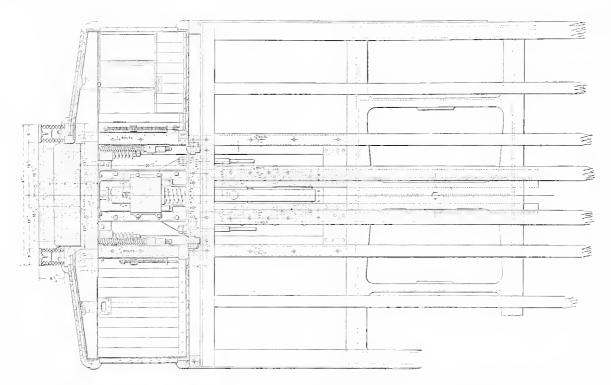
Plan of Gould Wide Vestibule Steel Platform, with Friction Buffer and Draft Gear.
